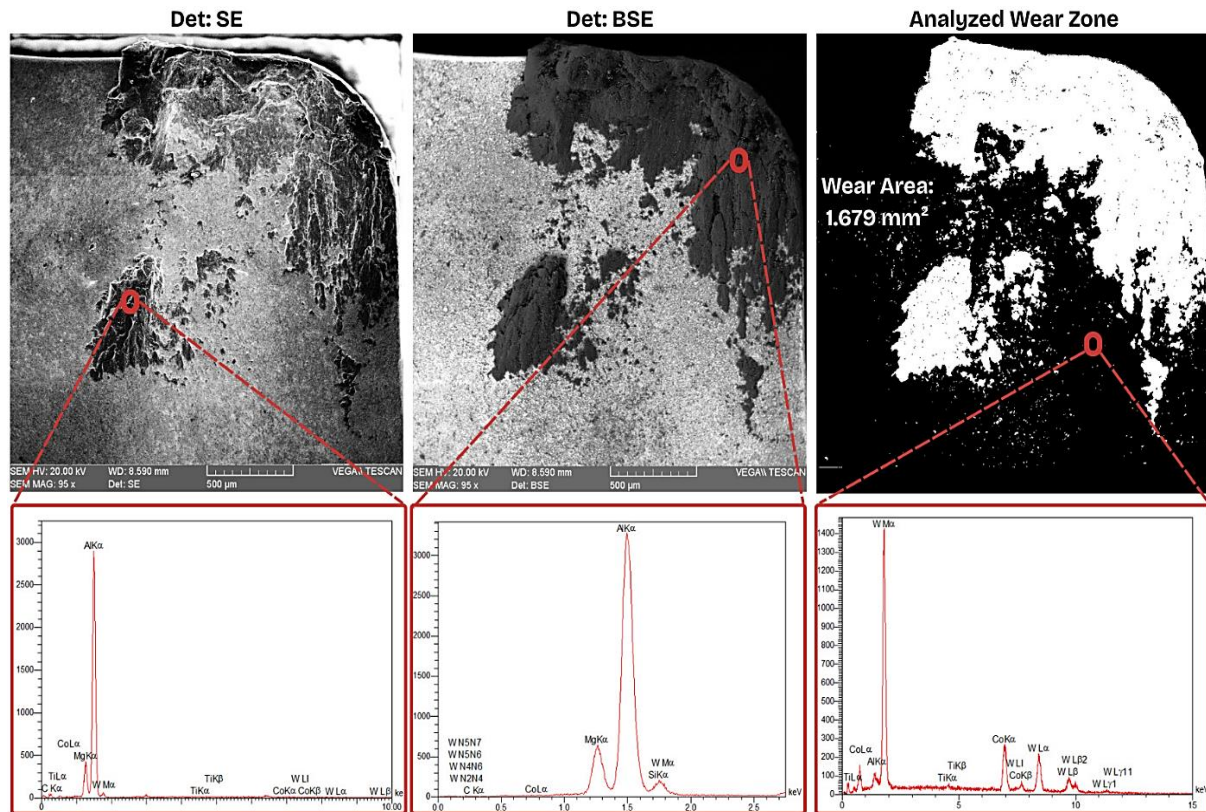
Tool wear mechanisms under machining conditions: L = dry, $f = 0.2$ mm/rev, $d = 1.5$ mm, $N = 1000$ rpm.
